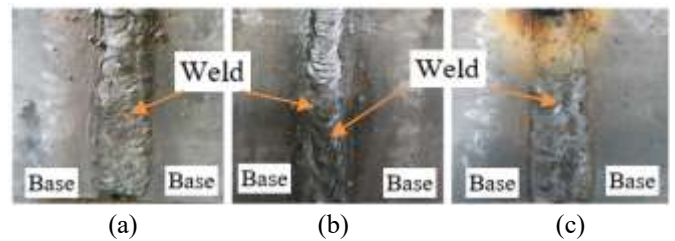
Welding Results. (a) Double V, (b) Single V Groove, (c) Single Bevel Groove
